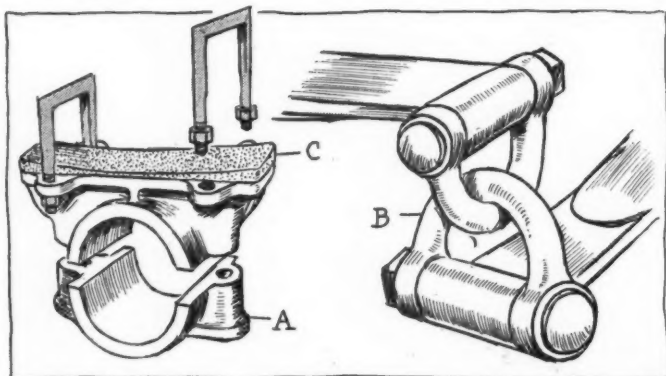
Fixtures for spring installation; A, spring pad; B, double shackle; C, fiber block filed to shape
